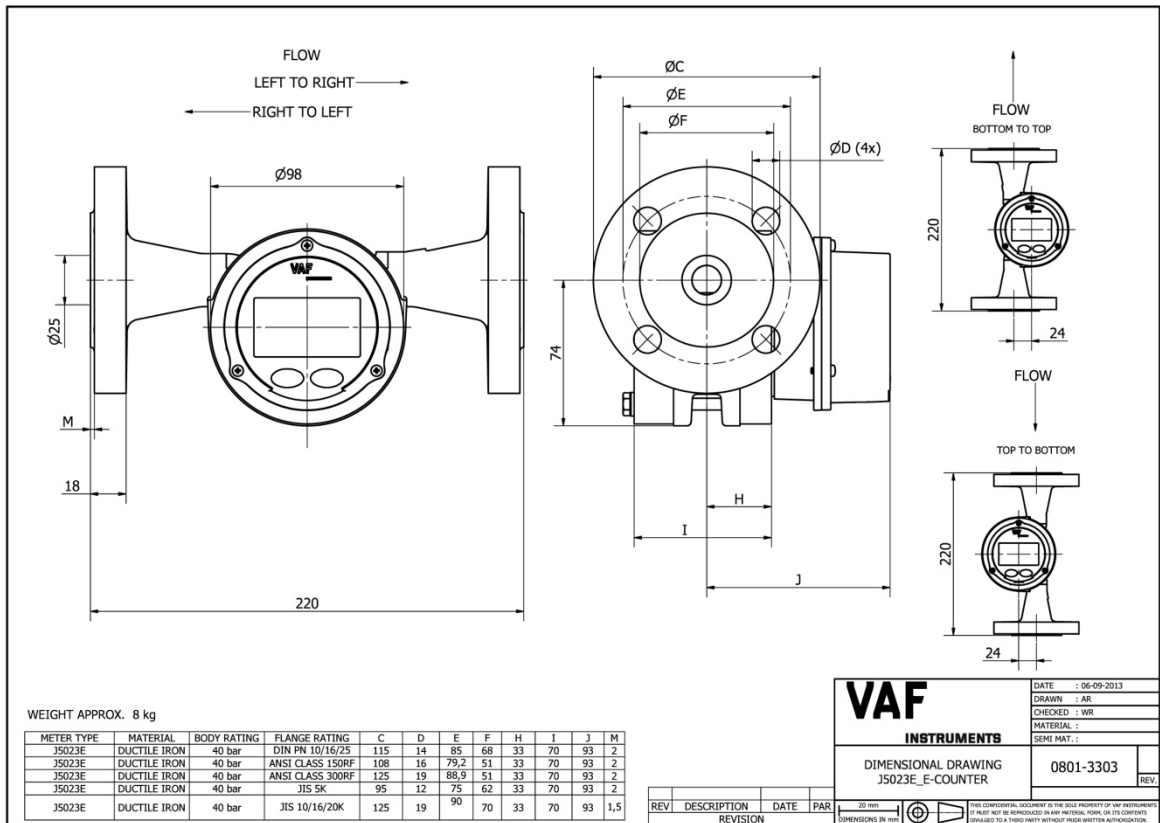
Drawing 0801-3303 – Dimensional drawing J5023E E-counter
